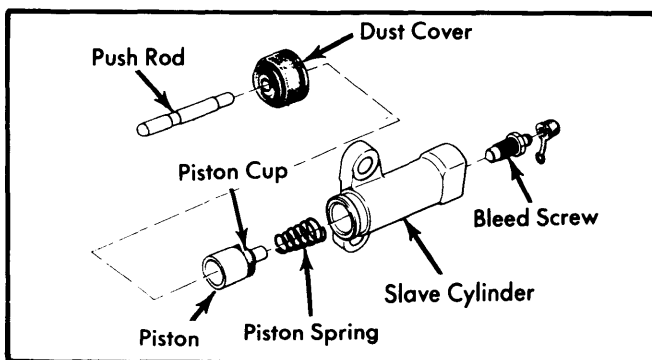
Exploded View of Clutch Slave Cylinder Assembly — (Except B210 Models)
